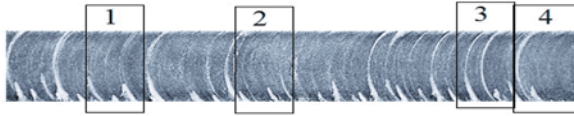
The ROI along good (1,4) and defect (2,3) weld regions of processed weld bead image of CN2.
